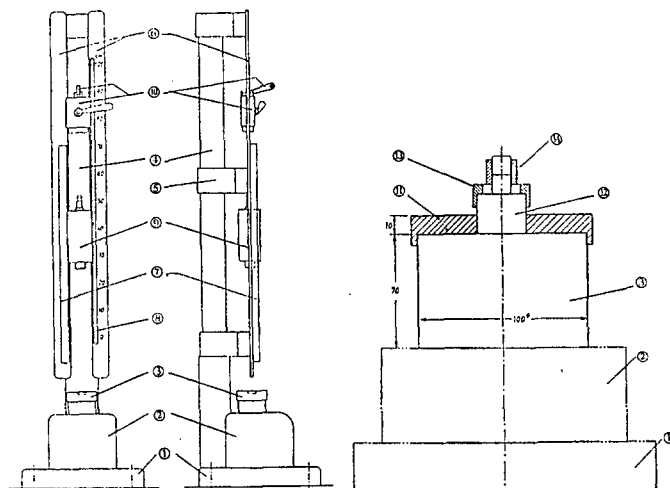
Fall-hammer II, front and side, general view dimensions in mm
